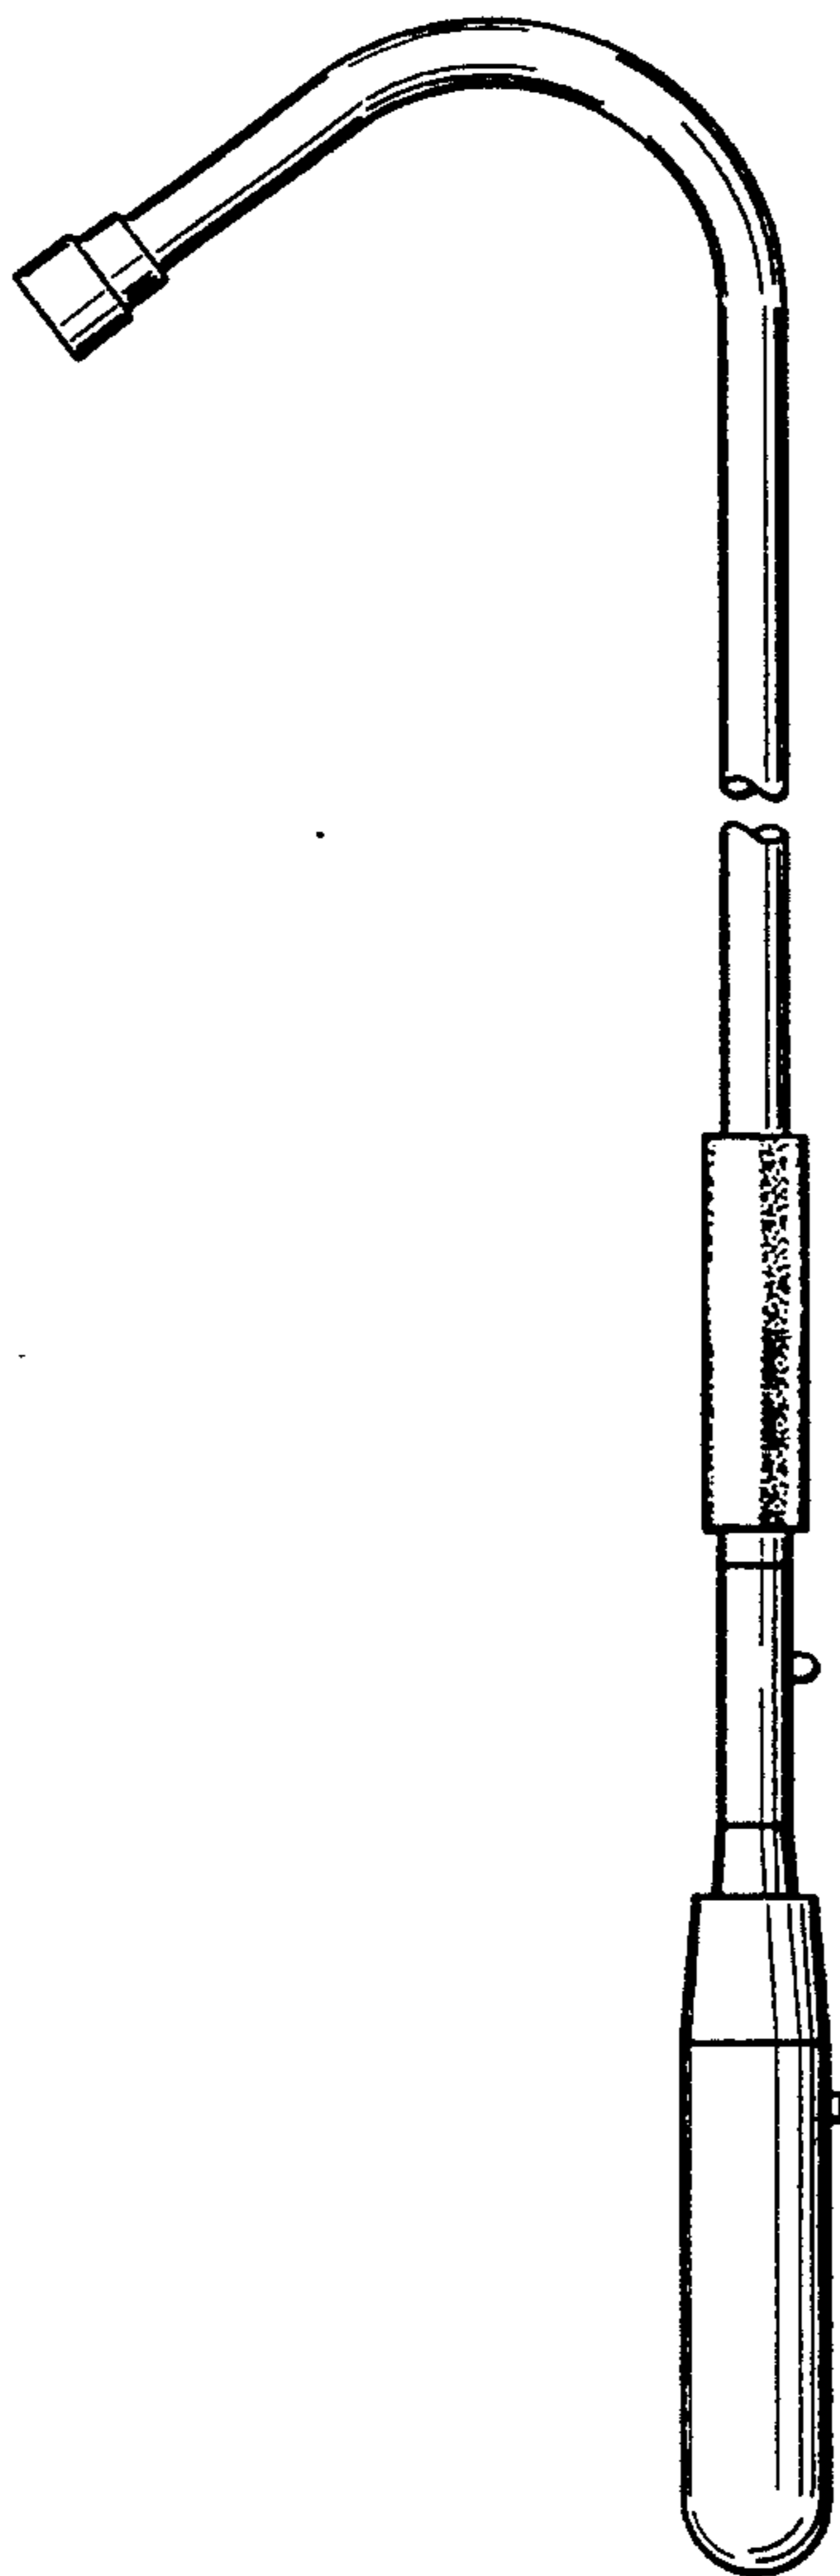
is a front elevational view of a motorized extension tool used to open and close clerestory windows and skylights, showing my new design, shown fragmented to indicate indeterminate length;
